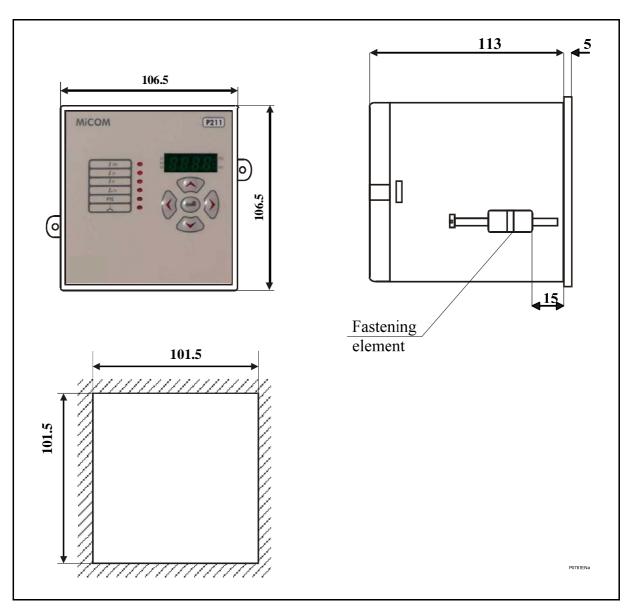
CASE DIMENSIONS FOR THE FLUSH MOUNTING CASE
